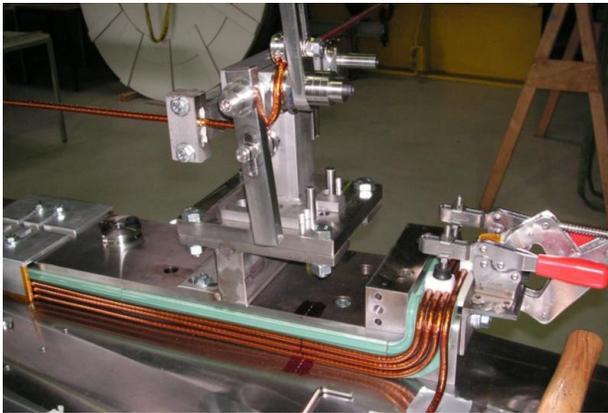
Photo during the winding process. The 4th turn of the inner layer is just being pre-bent to fit into the framework created by the innermost G11 pieces. Besides the coil in progress, the winding core (pre-) bending tooling and various clamping elements are visible.
